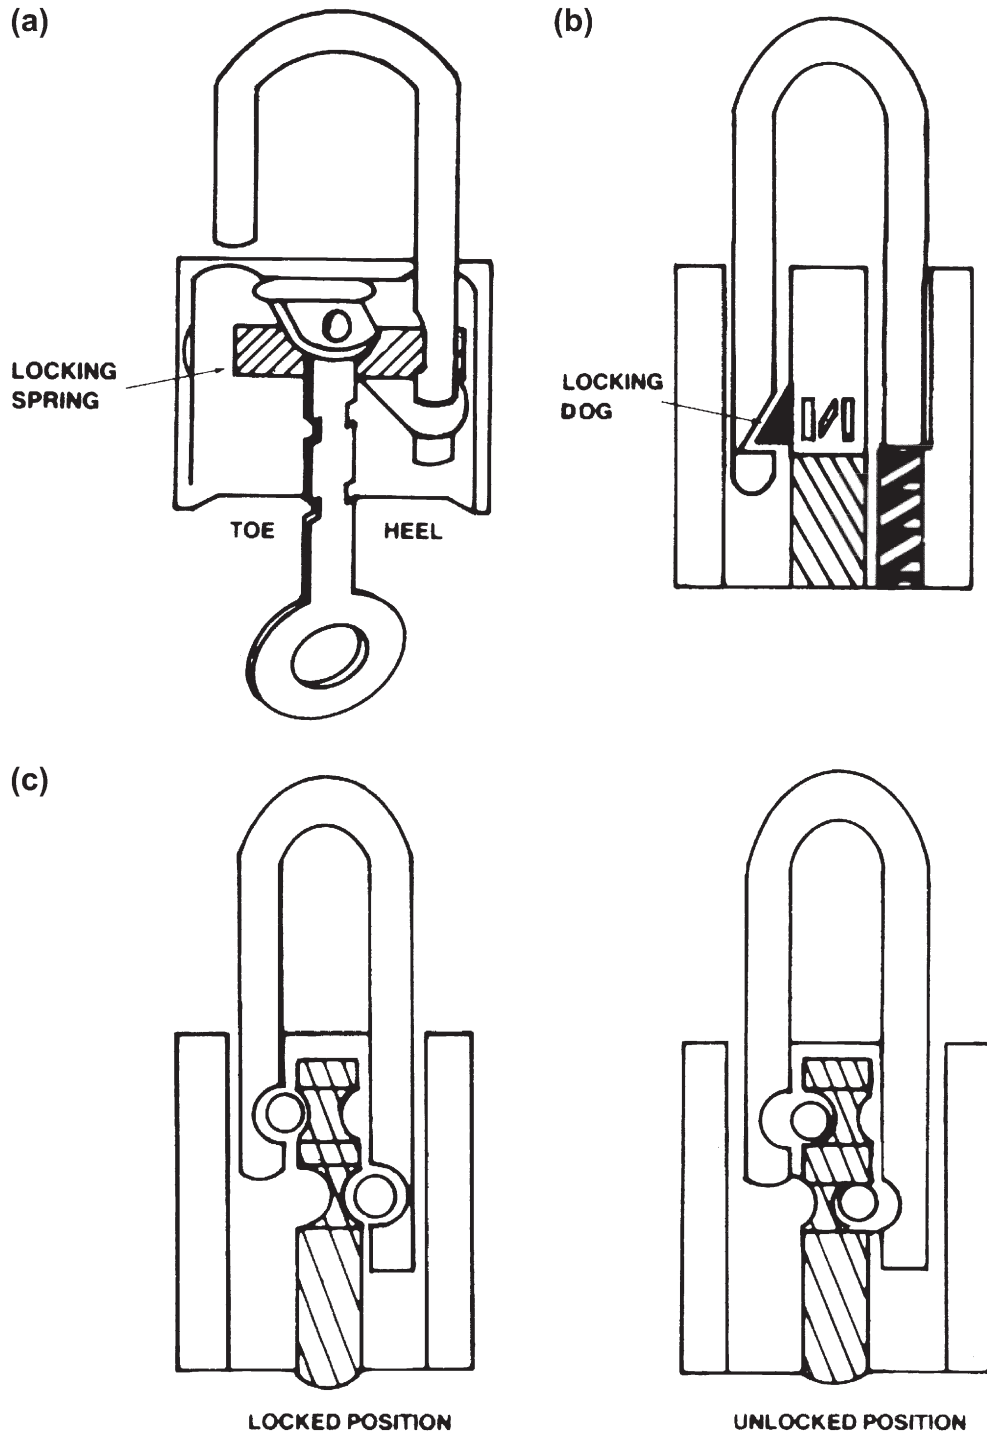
Three methods of securing the shackle inside the lock body: (a) warded padlock with locking spring (heel locking), (b) padlock with locking dog (toe locking), and (c) positive locking padlock (heel and toe locking).
